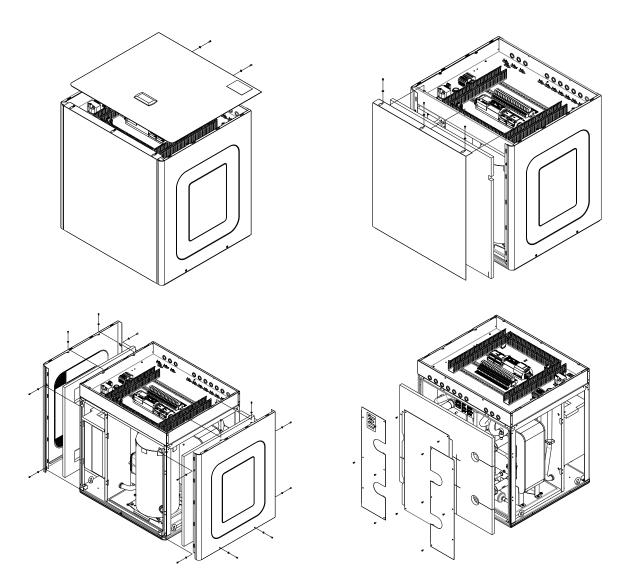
Disassembly of the covers of the ecoGEO+ HP models.
